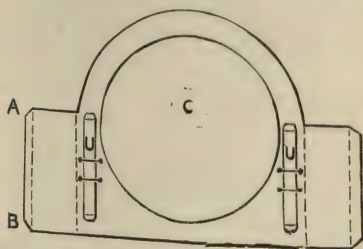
Piece to carry Lens Tube (T-Piece).
